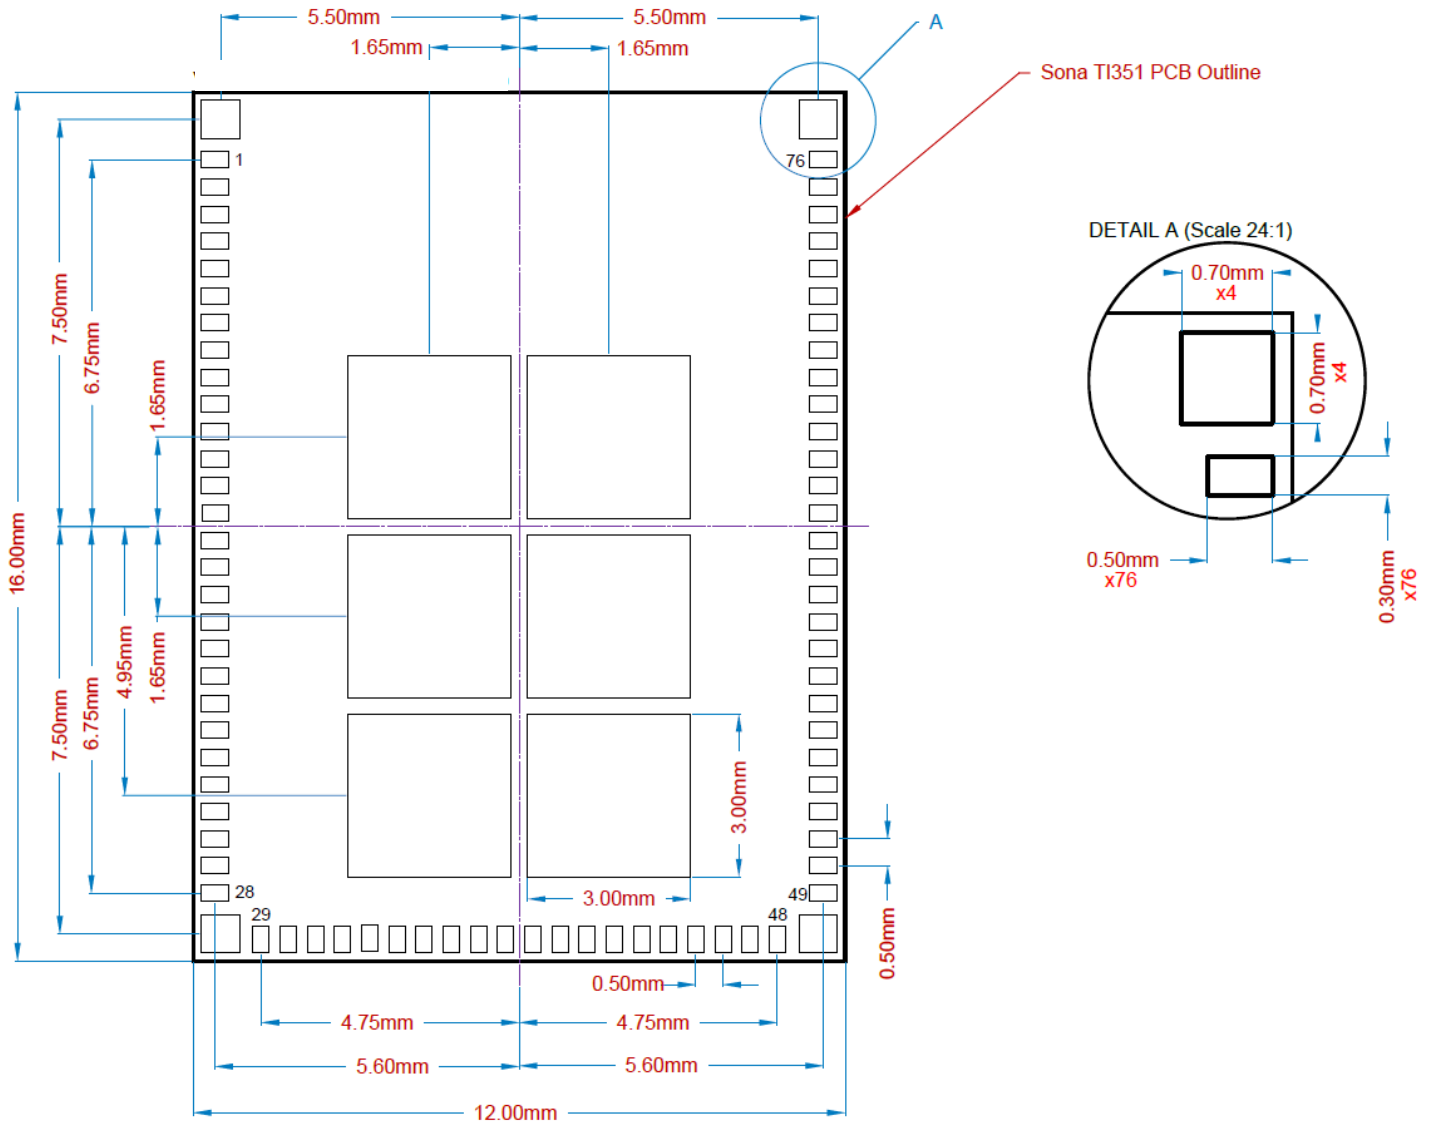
PCB Land Pattern (Top View) - TI351 Integrated Chip Antenna Module (453-00200)
